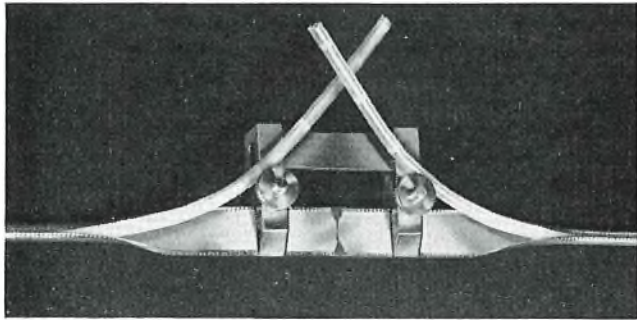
BRAZED OUTER-CONDUCTOR HELD IN CLAMP
